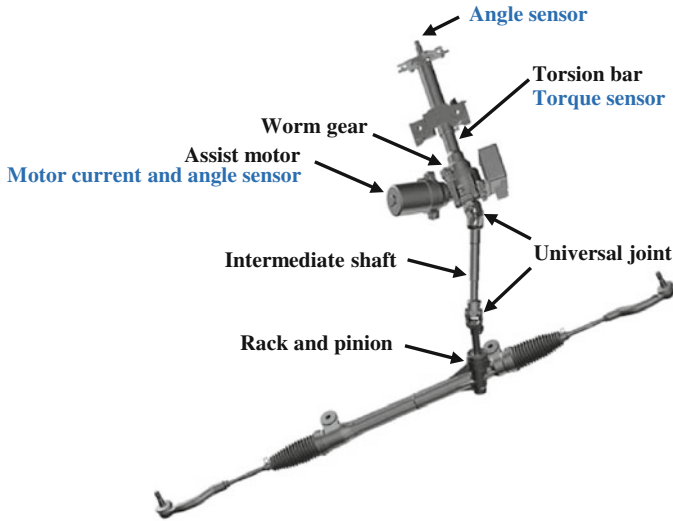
Assembly view of JTEKT C-EPS and the available sensors
